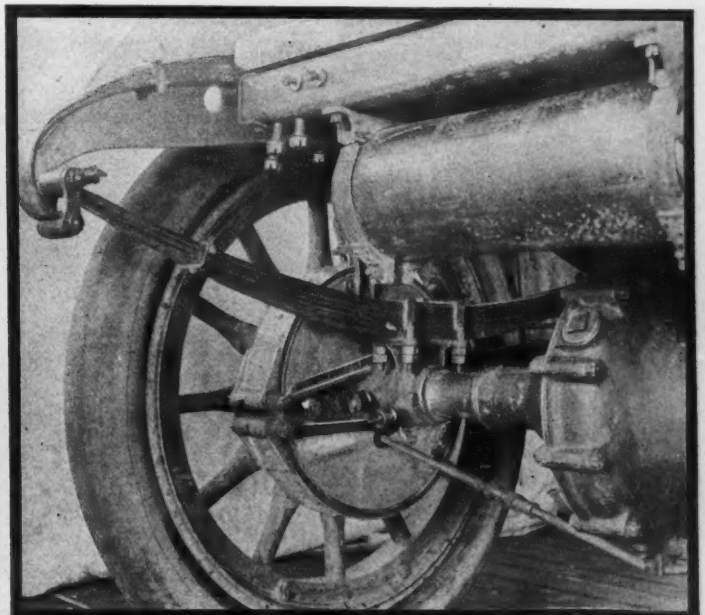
LOCOMOBILE BRAKES AND REAR AXLE
